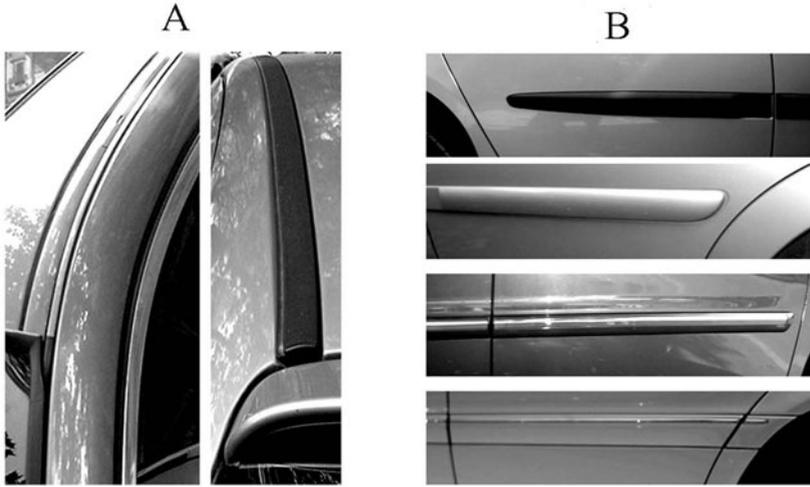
Examples of roof outer moldings (A) and side moldings (B).
